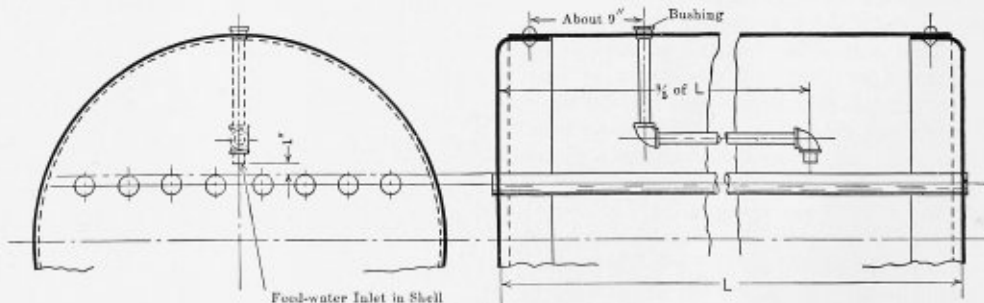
Feed Water Inlet Located in top of Shell Near Front Head
